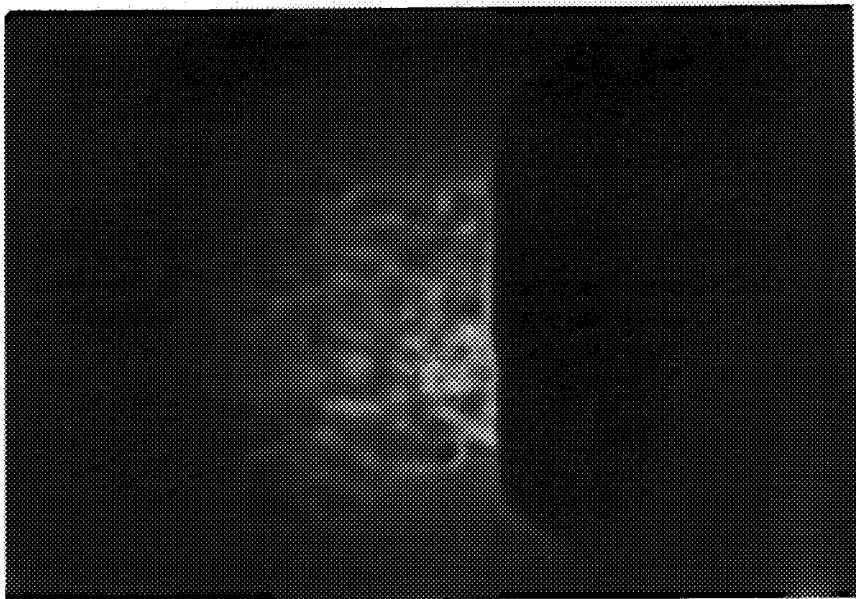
Heated Argon Gas from a Welding Torch.
